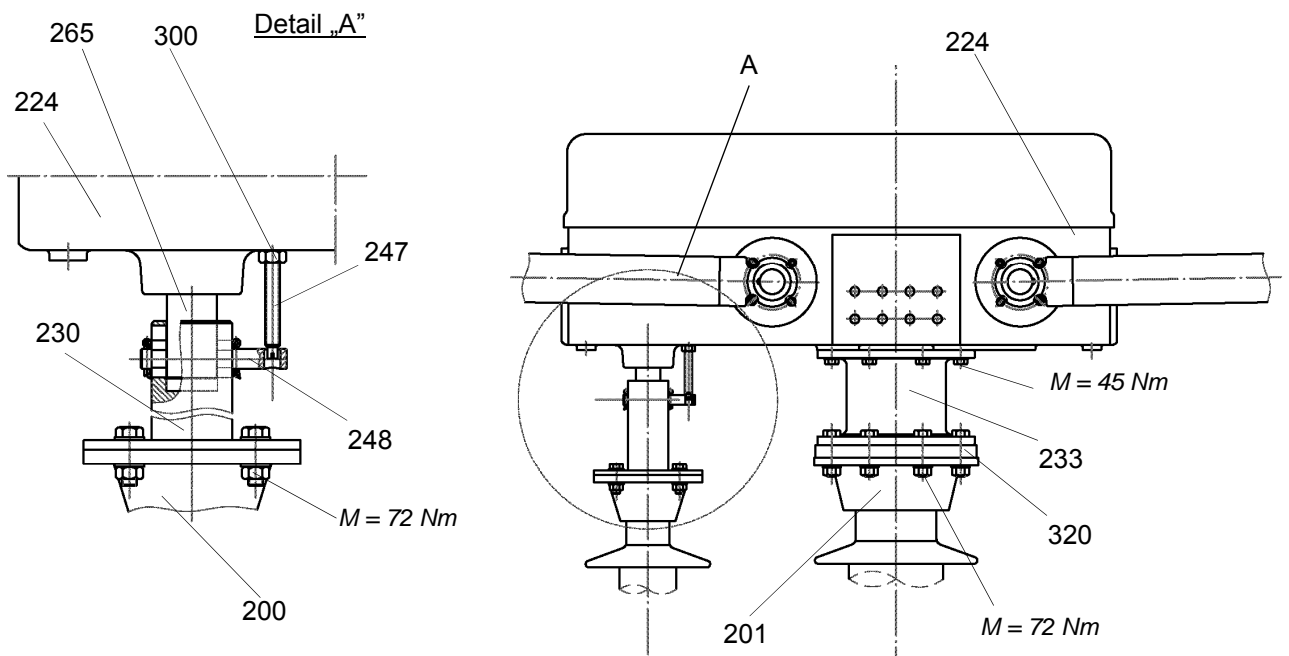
Installation of gearbox, top intermediate piece and insulators. Connecting of collar 320 and rotary insulator
